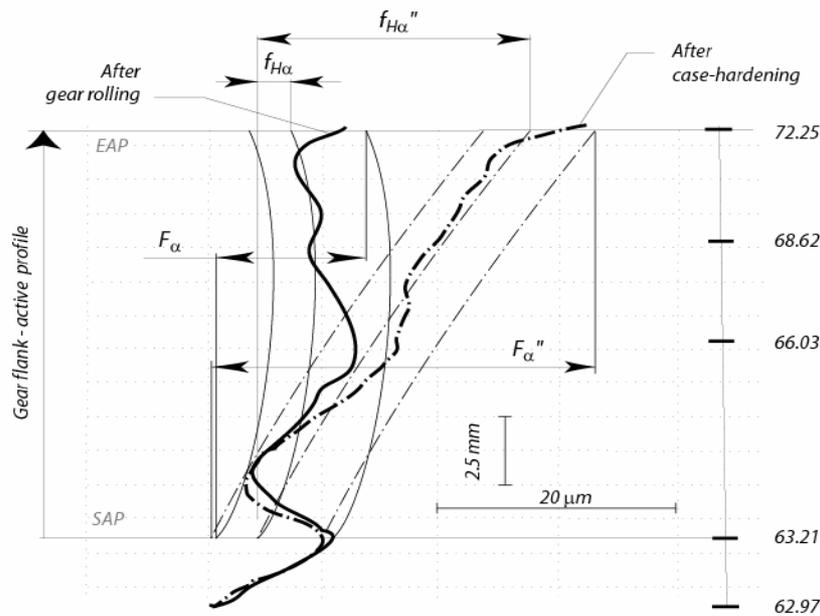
Typical involute profiles of the test gears after gear rolling and after case-hardening. The profile curves belong to the same gear flank, and they were drawn over the scanned profiles from the gear measuring center chart. SAP stands for start-of-active-profile and EAP stands for end-of-active-profile of the gear tooth flank.
